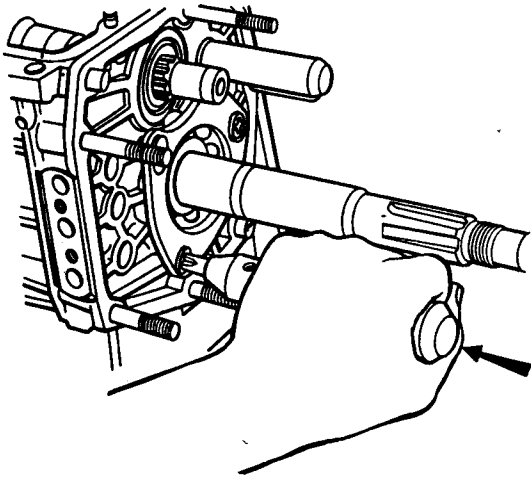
Removing Fastening Screws of Main Shaft Intermediate Bearing Locking Plate with Power Screwdriver. Arrow shows direction of impact stroke (when striking the screwdriver with a hammer)
